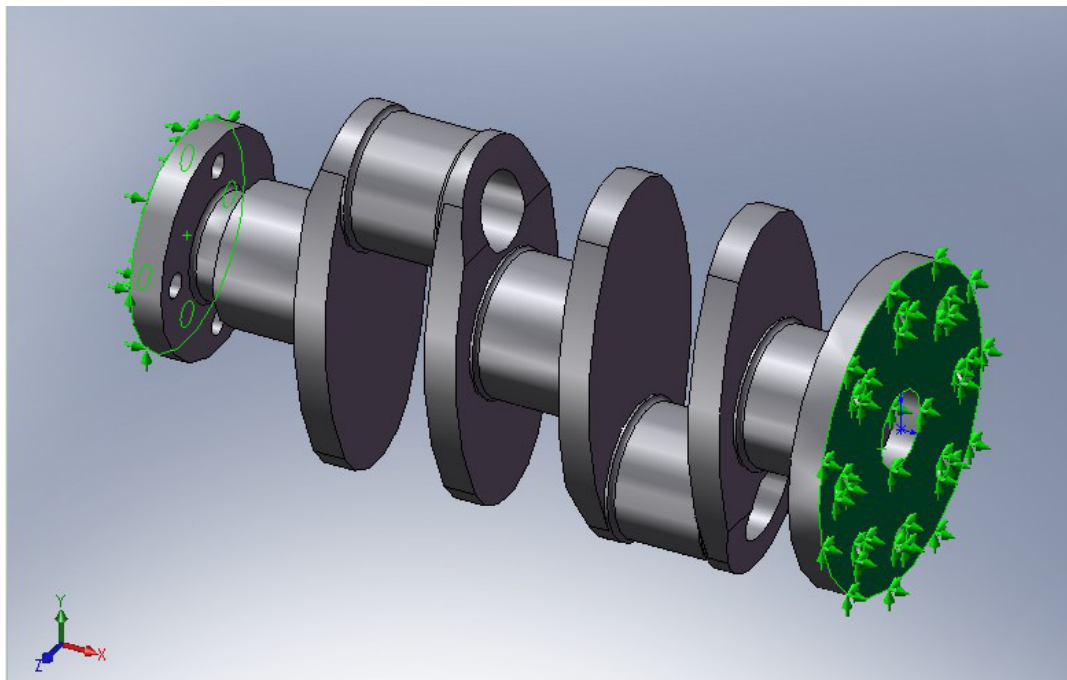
3D crankshaft CAE simulation CAE (constrained points)
